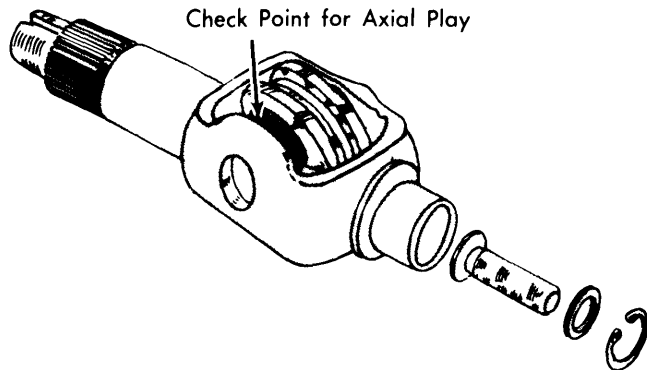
Showing Roller and Axial Play Adjusting Screw
